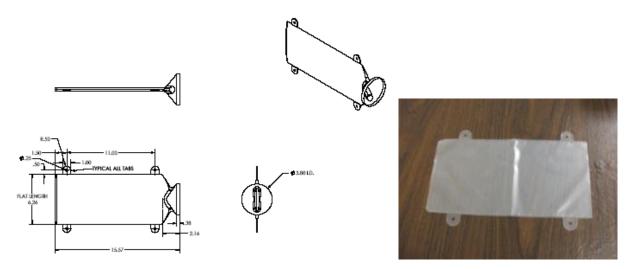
The New Counter-Lung Will Be Welded Polyurethane
